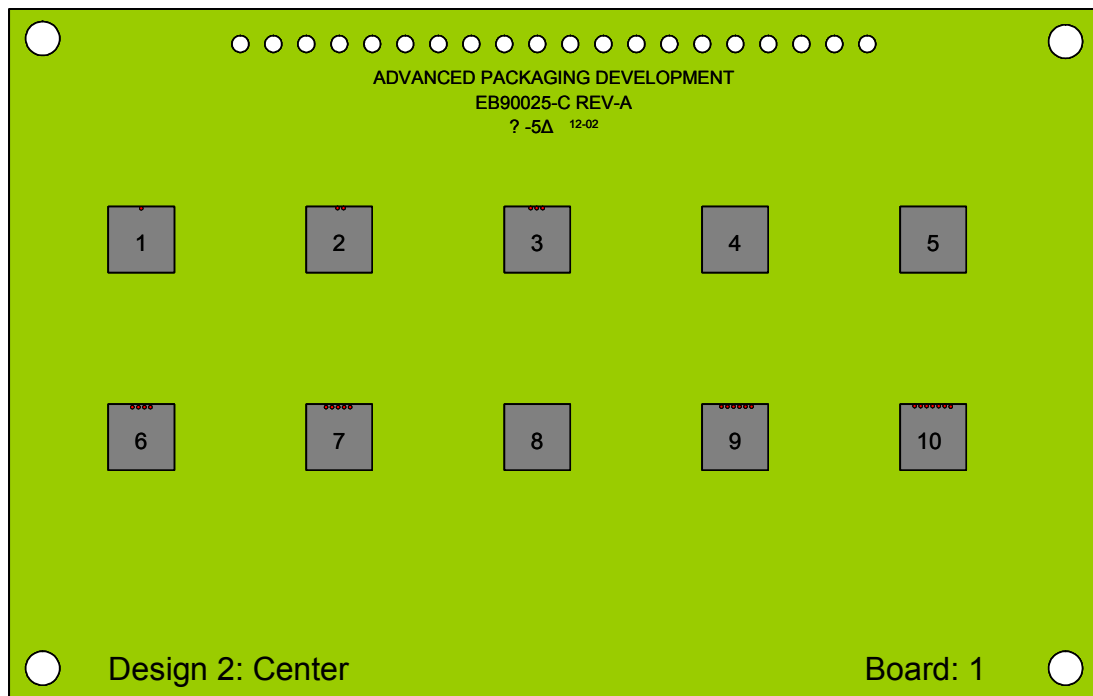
PCB Design with Open Bumps Starting from the Middle of a Side (Design 2)
